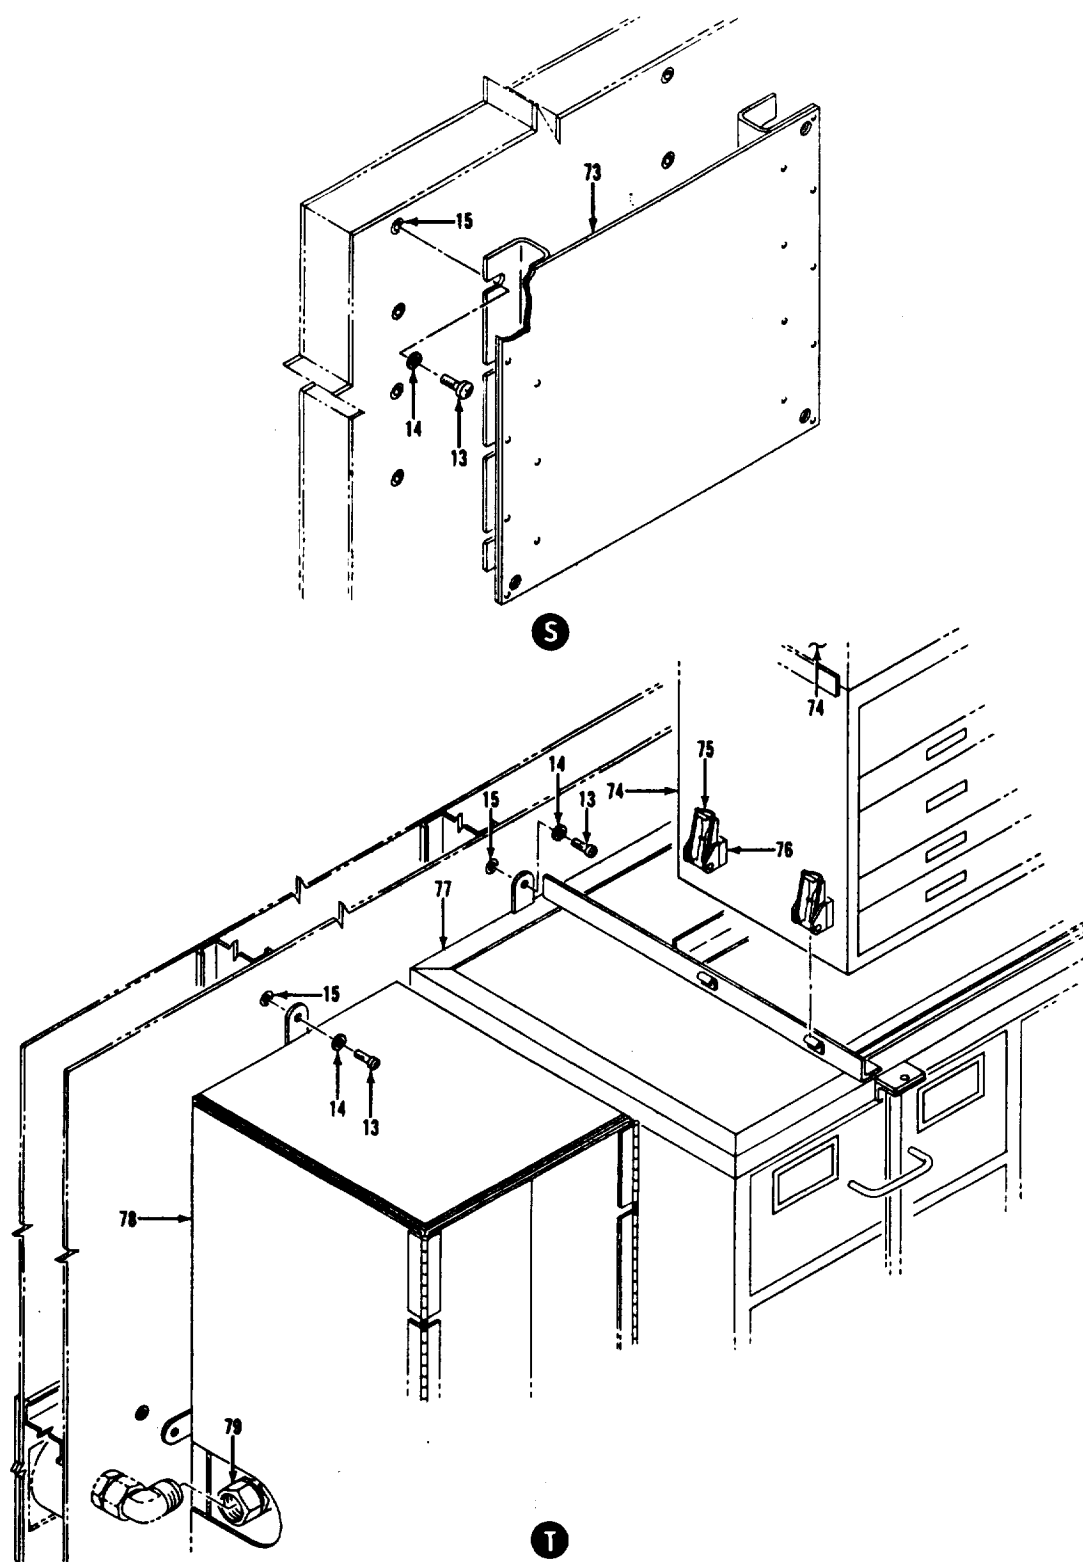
Equipment Installation (Sheet 8 of 25)
